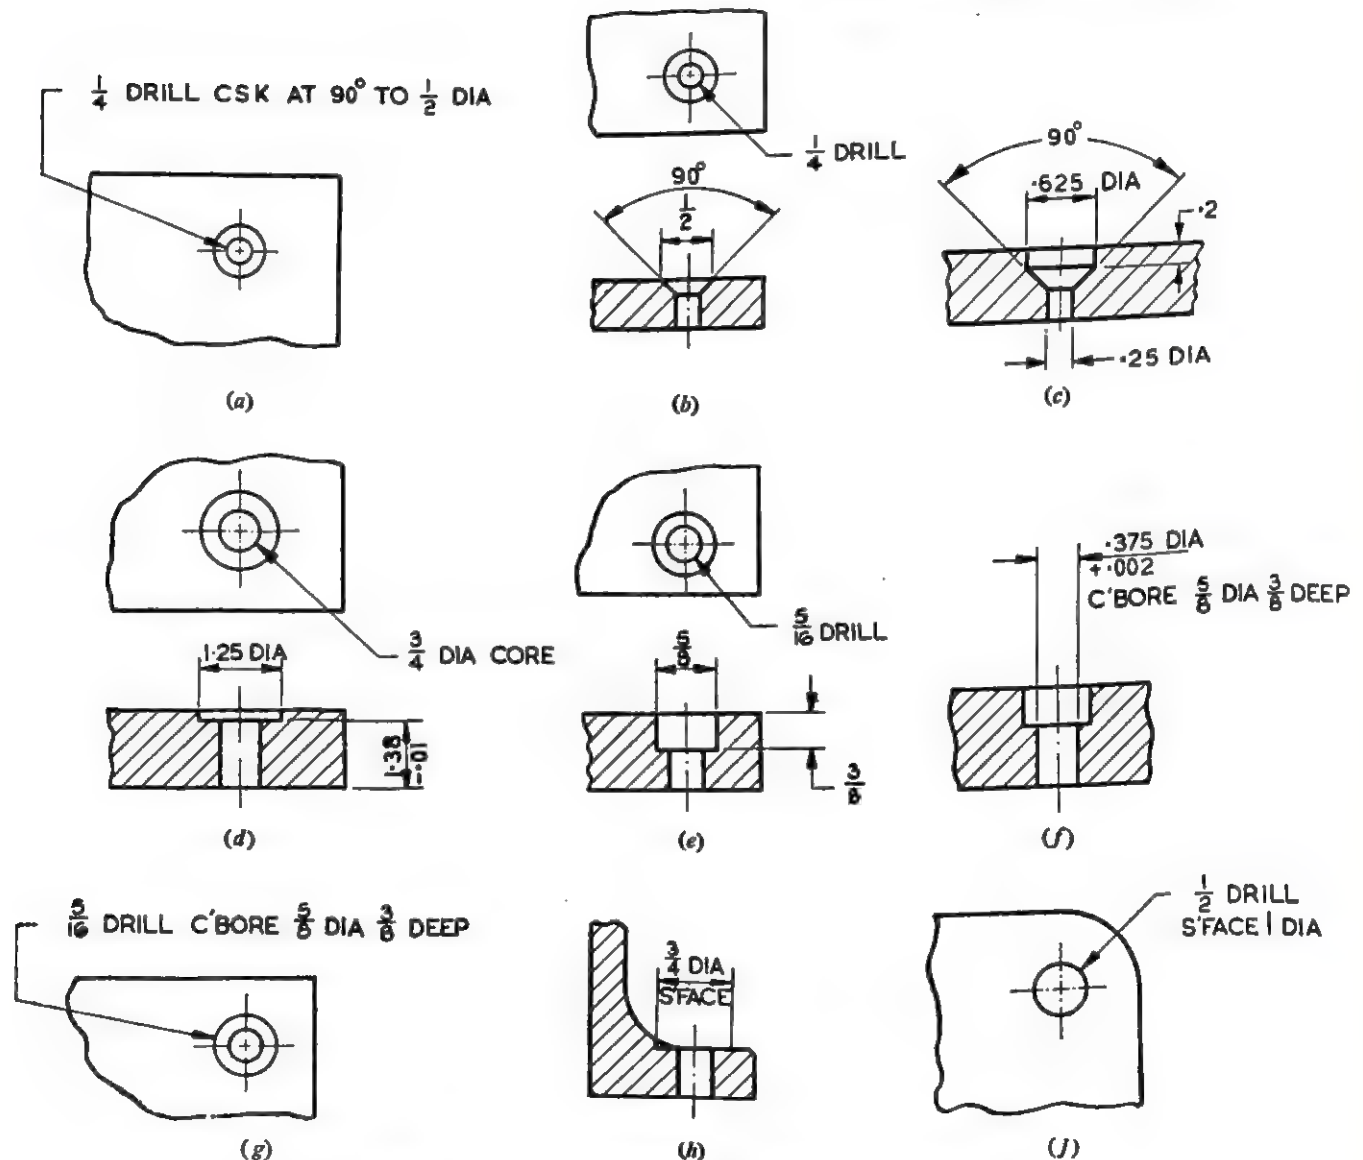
Dimensioning countersinks, counterbores and spotfaces
